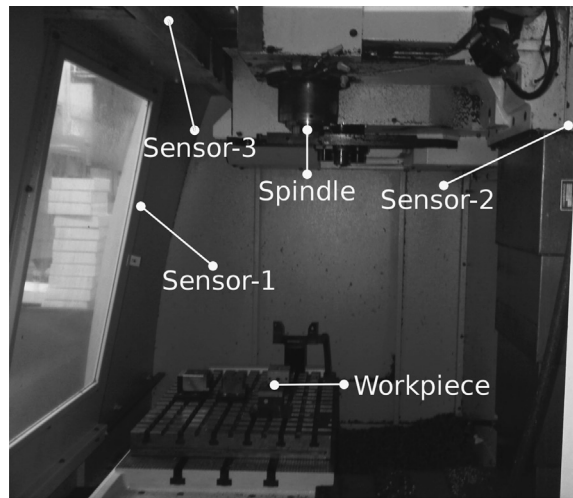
Position of the AE sensors, spindle and workpiece, inside the CNC milling machine.
